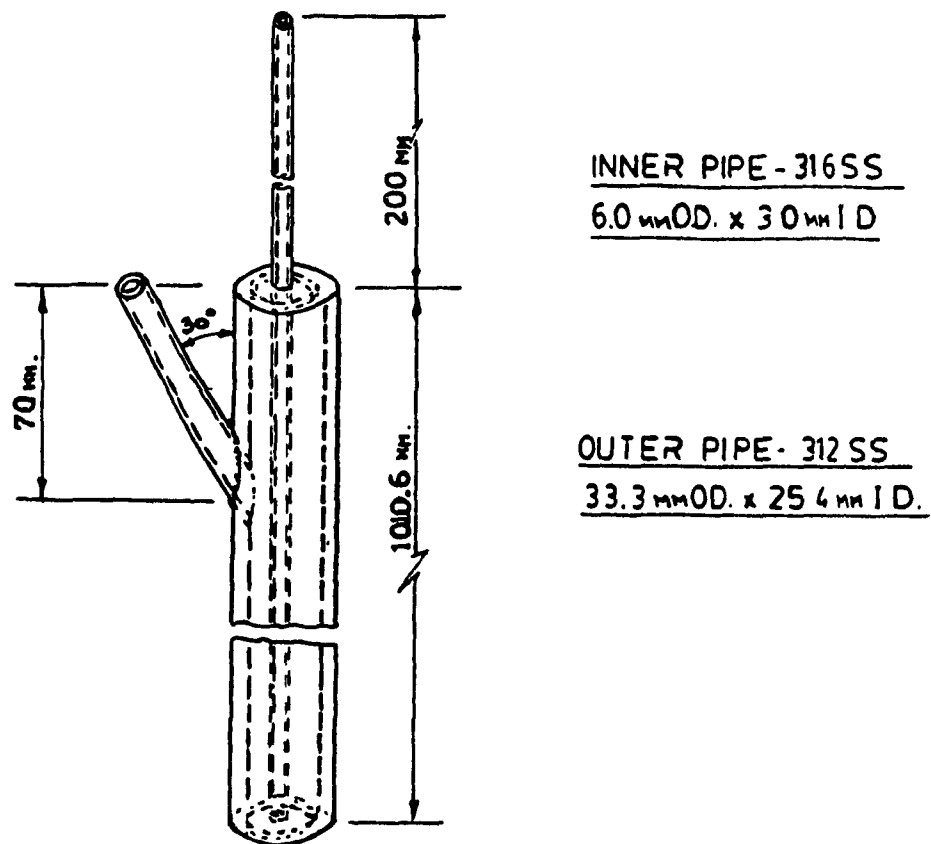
Dimensions and Materials of Laboratory Scale Heat Pipe Injection Lance
